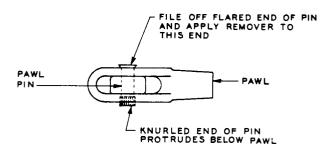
Rotary Pawl with Headless-Type Pawl Pin Having Protruding Knurl
